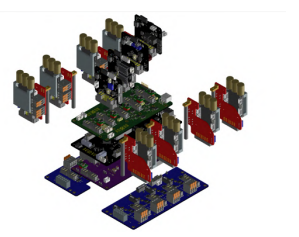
BBAUV 5.0 Electrical Stack Exploded View.
